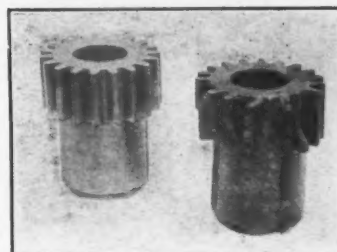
STEEL PINION TO REPLACE CAST-IRON ONE IN COACH WHEEL LATHE.
